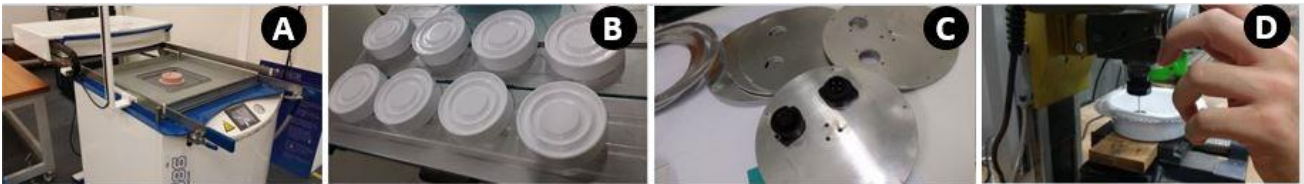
Manufacturing process a) Formech 686 vacuum former with mould, b) moulded and cut PVC parts, c) waterjet-cut aluminum plates and rings, d) process of cutting the inner PVC parts
